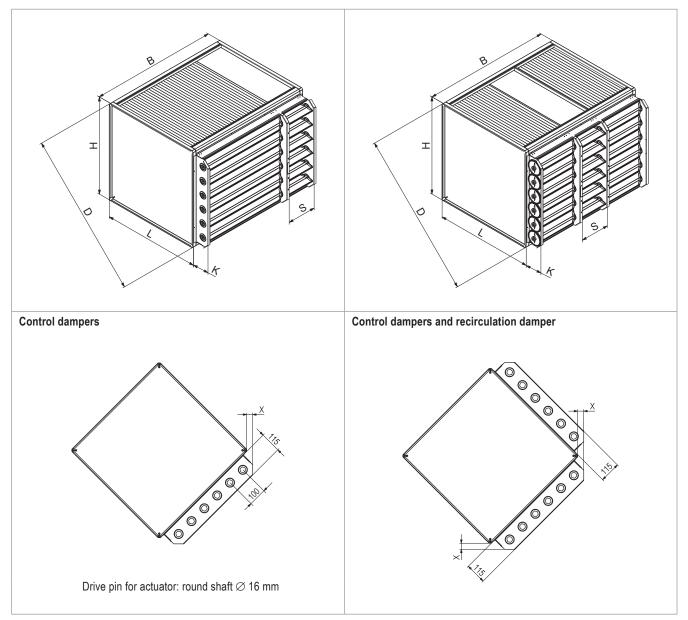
Dimension sheet for design S plate heat exchangers with dampers (dimensions in mm)
